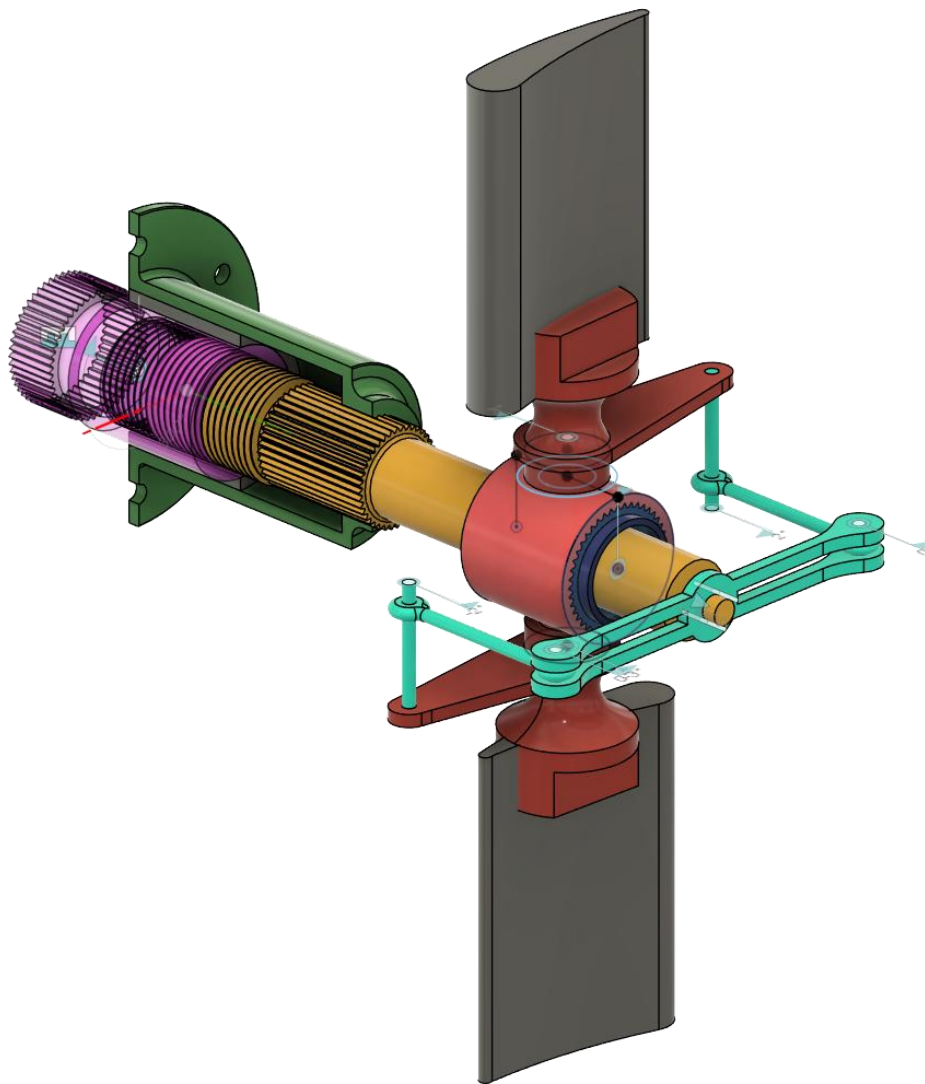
3D CAD reconstruction of the pitch change mechanism (not accurate dimensions)
